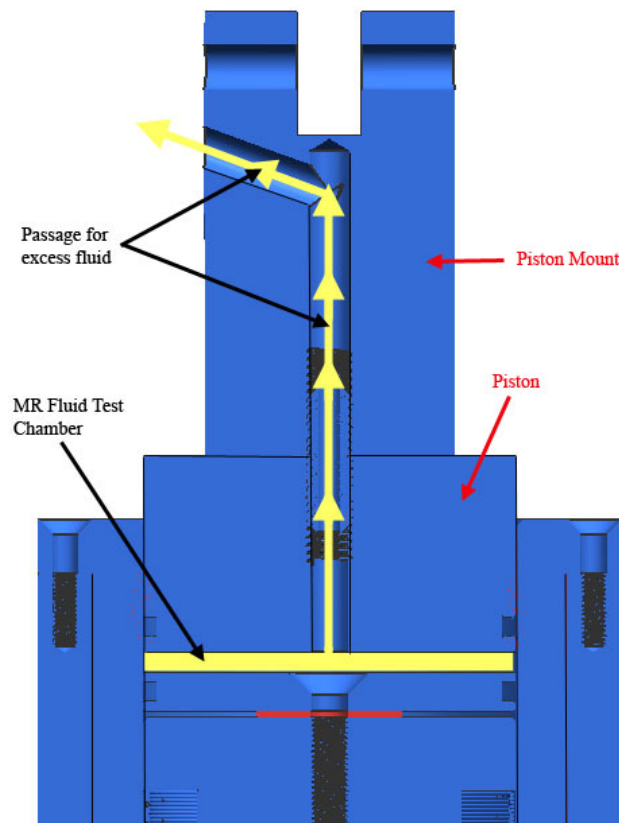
MR fluid is allowed in and out of the test chamber through a passage in the piston and piston mount
